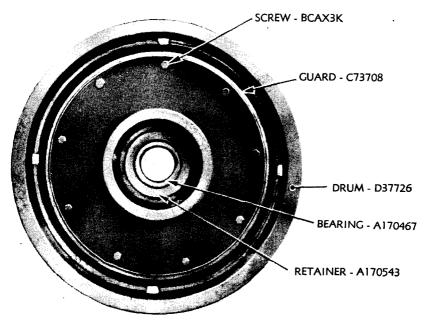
Disk and Rim Wheel Hub Assembly - Front View
